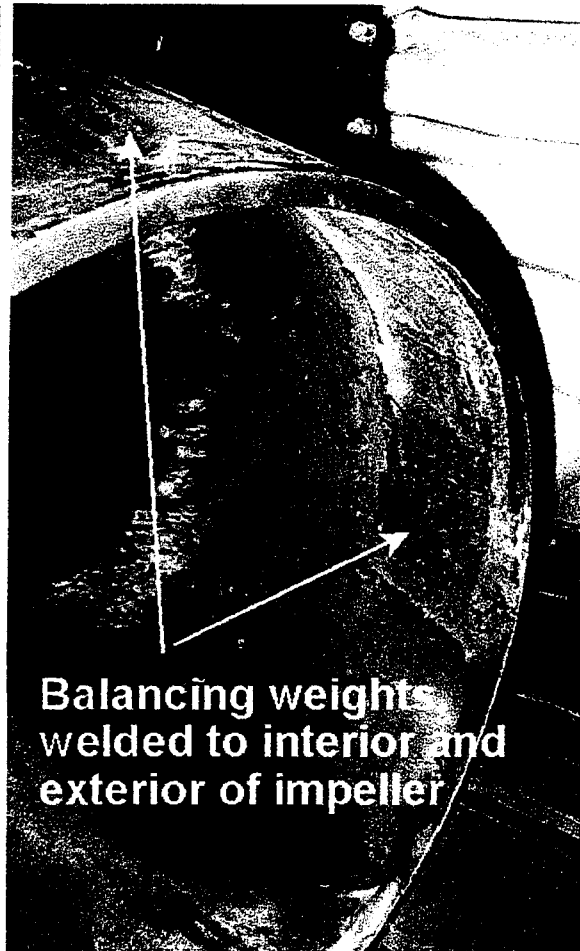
Balancing weights added to Wemco impeller. Steel plates were welded to the interior and exterior surfaces of the impeller to allow dynamic balance.
